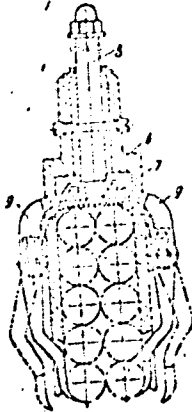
and 2. Arrangement for packing explosive cartridges.
